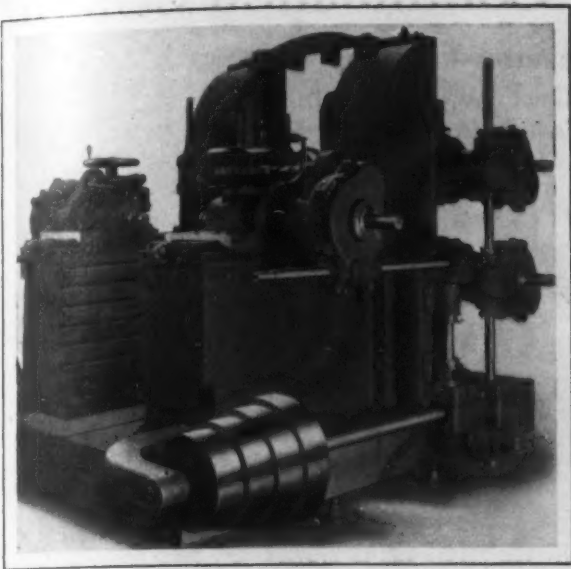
Rear View Showing Drive and Worm Feed Gears
